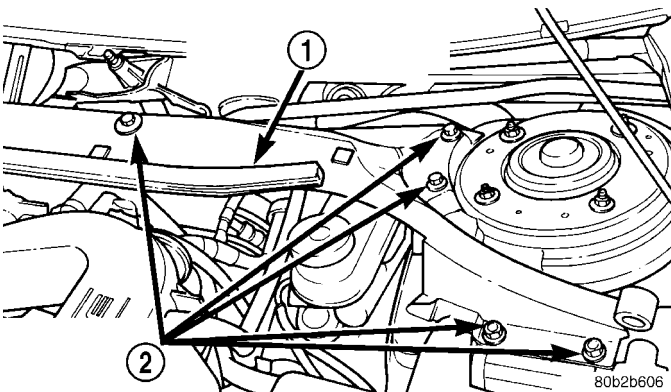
TOWER TO TOWER SUPPORT REMOVAL
